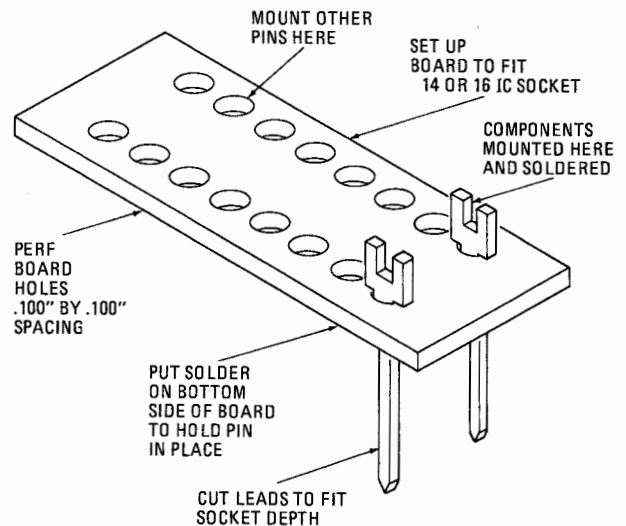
VECTOR T-44 PINS AND PERFORATED BOARD can be used as a plug-in terminal strip for discrete components.
